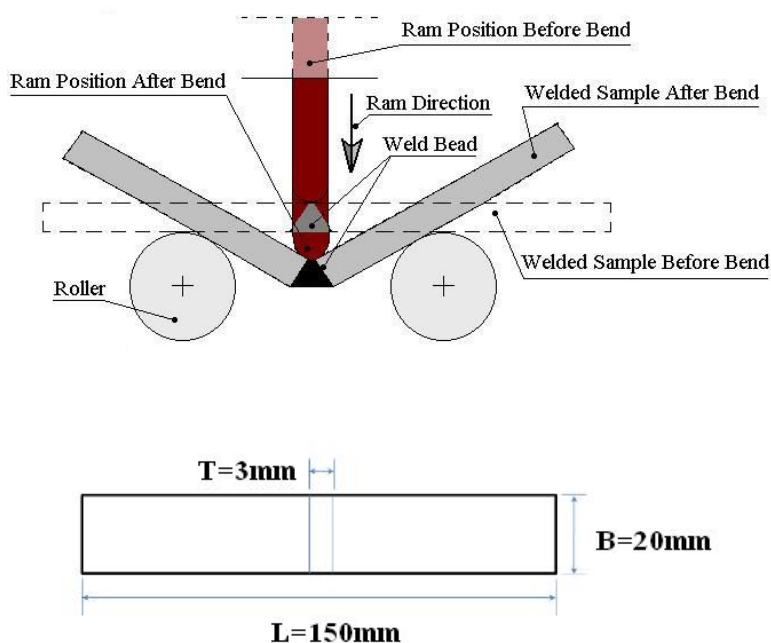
Schematic of bending test fixture and bending test specimen dimension
